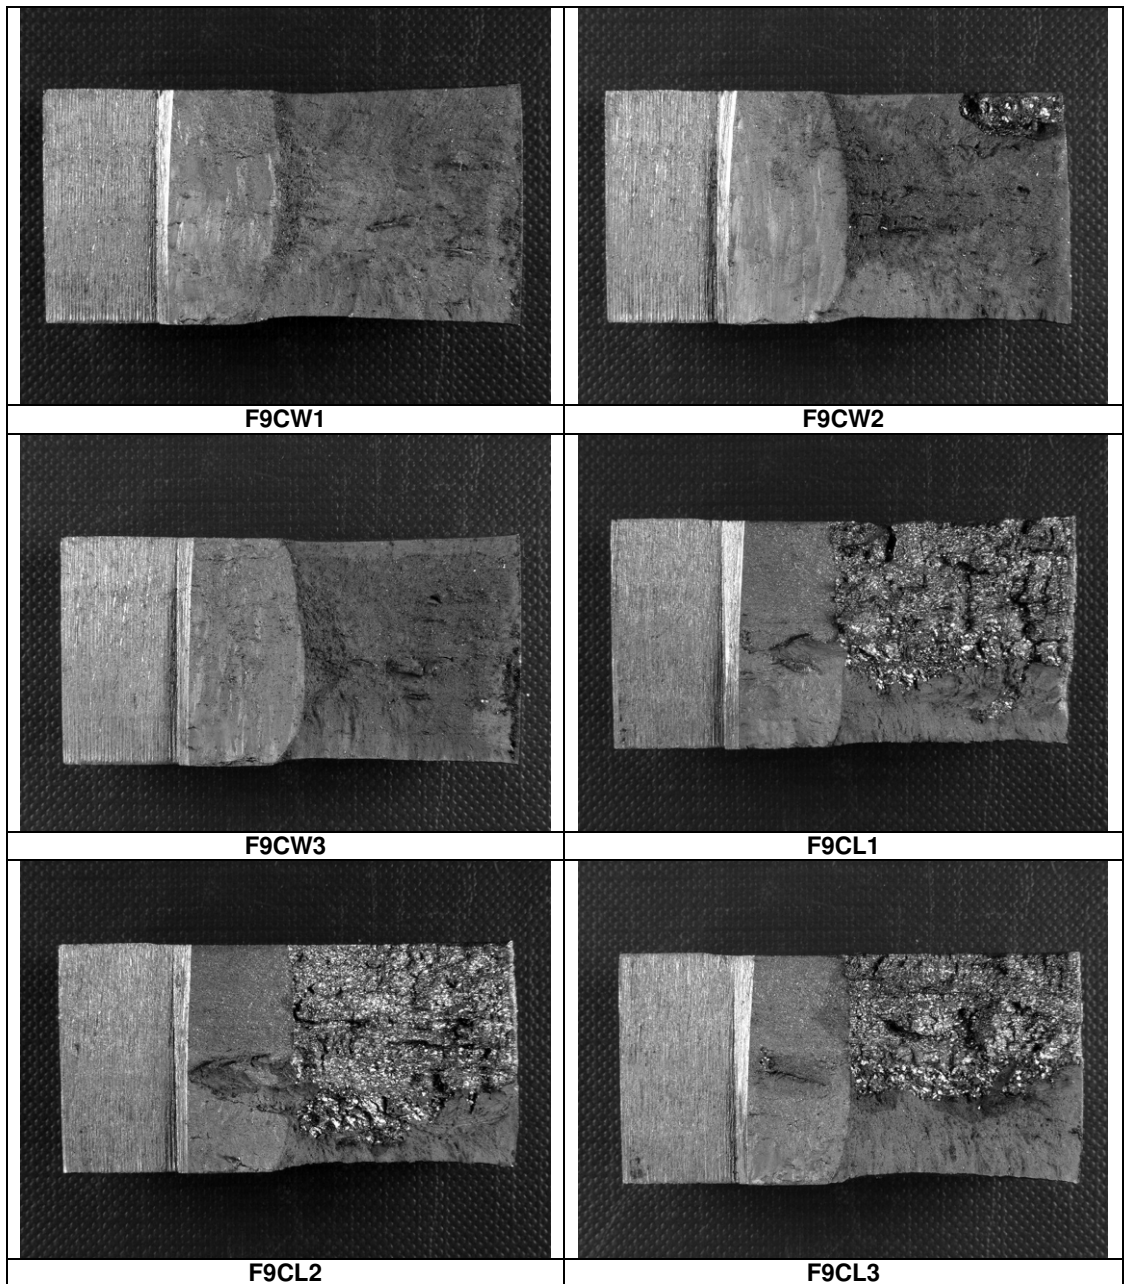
Fractographs of CTOD samples from 20 mm thick FCAW weld (F9).
